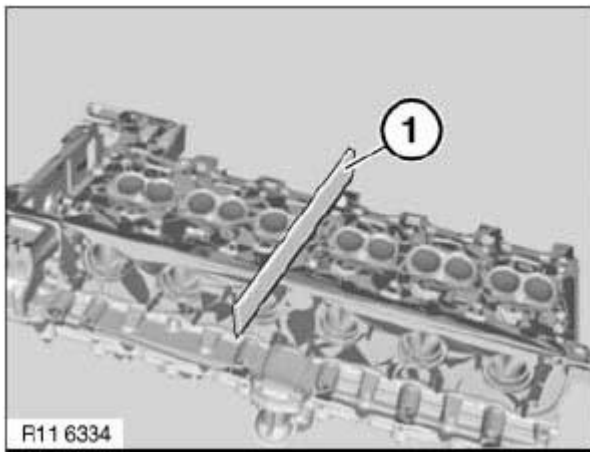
Identifying Evenness Of Cylinder Head Sealing Faces Using Standard Straight-Edge
